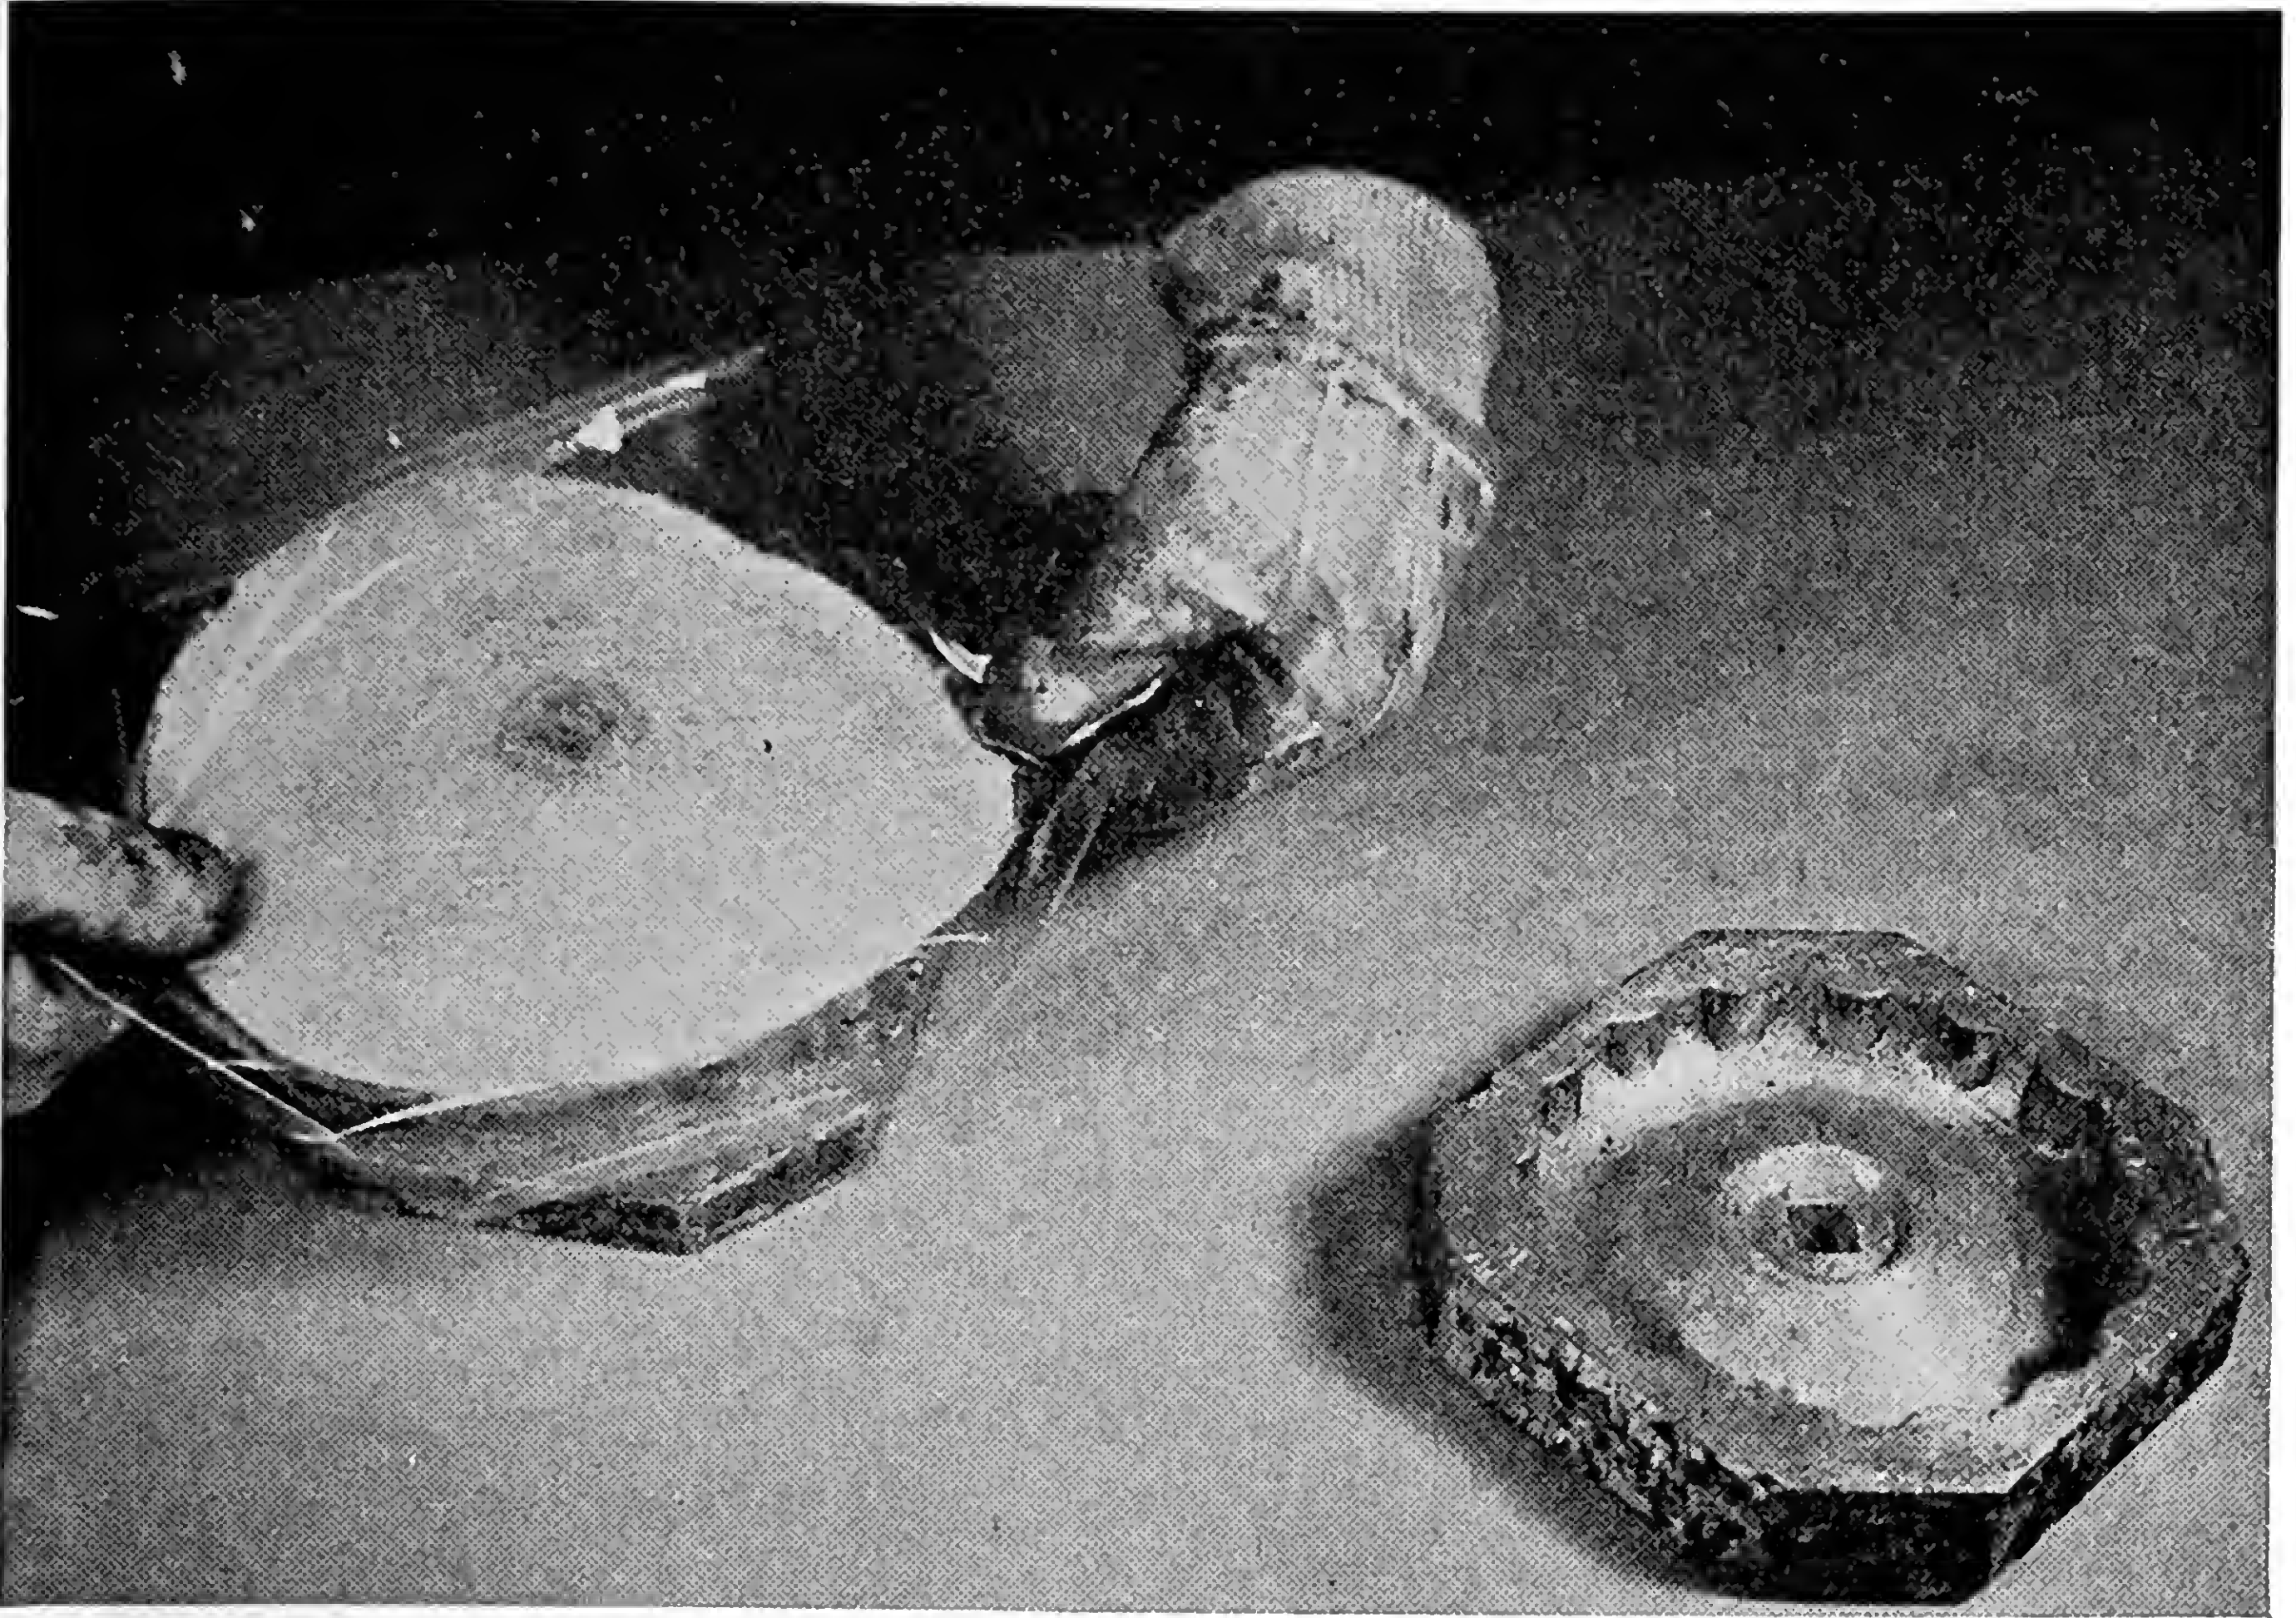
Placing assembly of resin coated mat with plastic film separator sheets on male die. Note pin in center to mold hole for valve stem.
